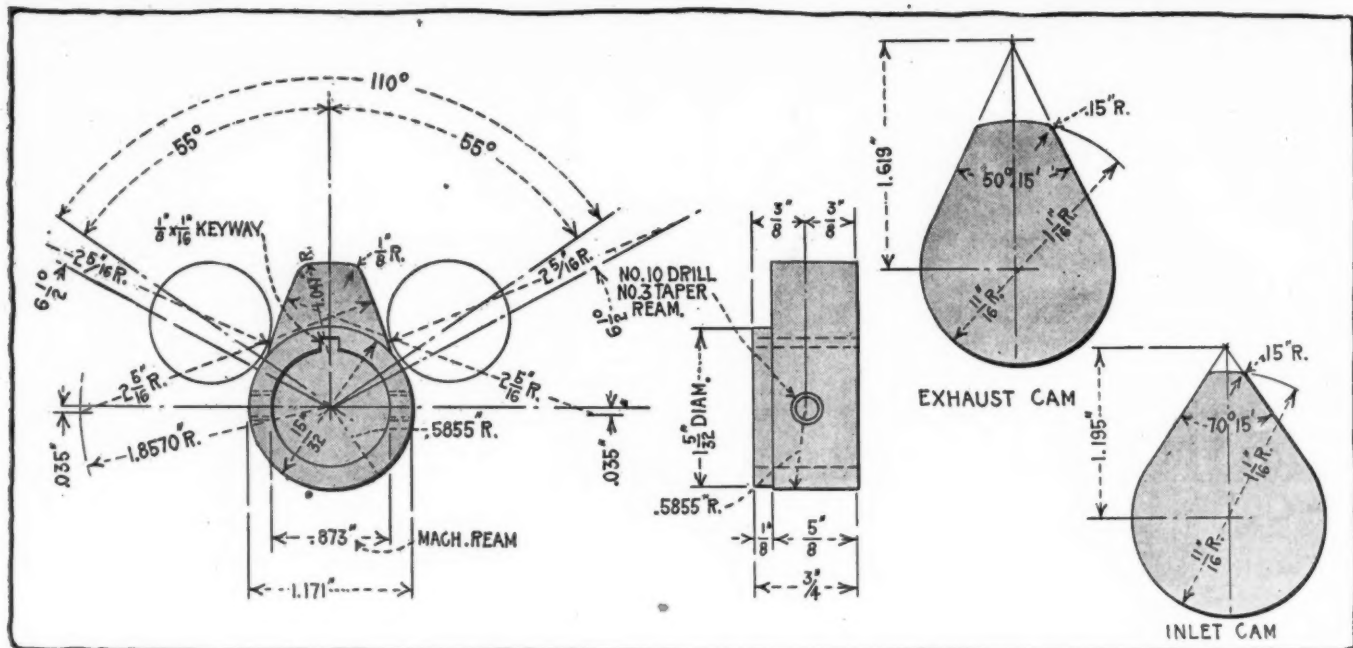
Left, full working drawing of a straight-sided cam. Right, illustrating difference in intake and exhaust cams
